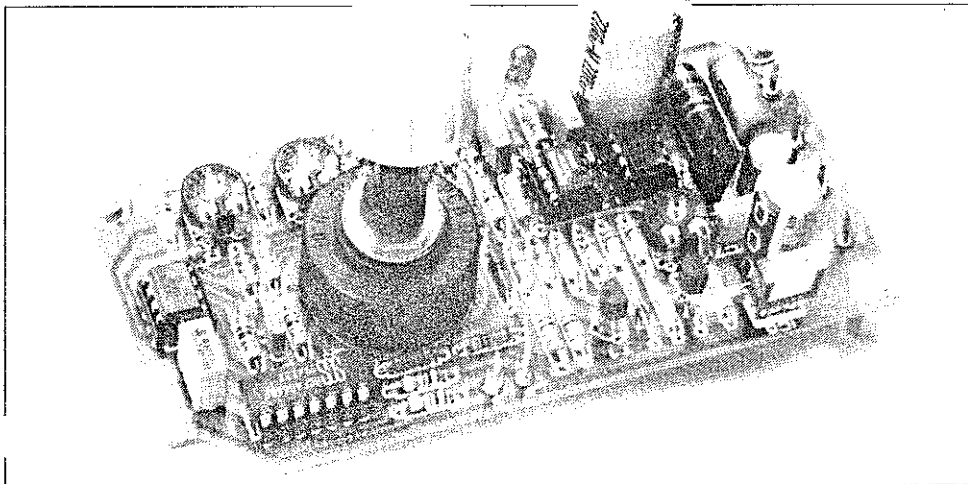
Completed circuit board, ready for fitting into the enclosure. Note that the left-hand bottom corner of the PCB is cut off diagonally.
